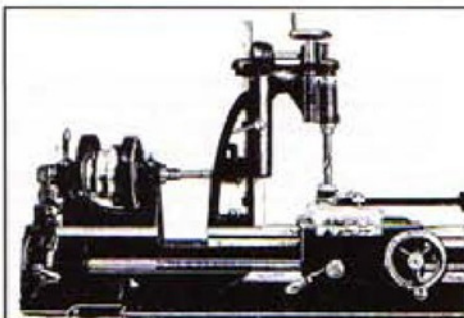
Large A.H. single pulley horizontal milling machine, c1917. Ibid.
